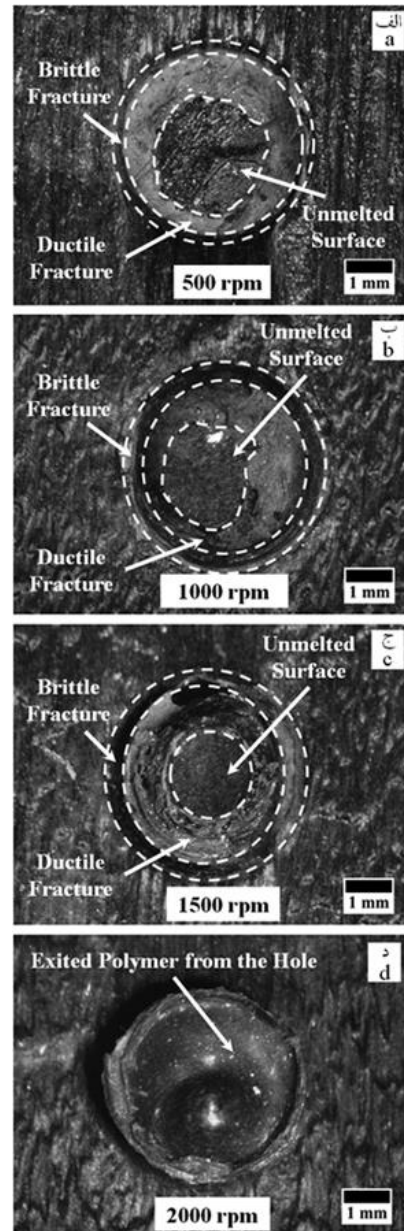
Fracture surface of polymeric composite sheet; change in the area of unmelted surface and fracture location at different rotational speeds: a) 500 rpm, b) 1000 rpm, c) 1500 rpm and d) 2000 rpm
